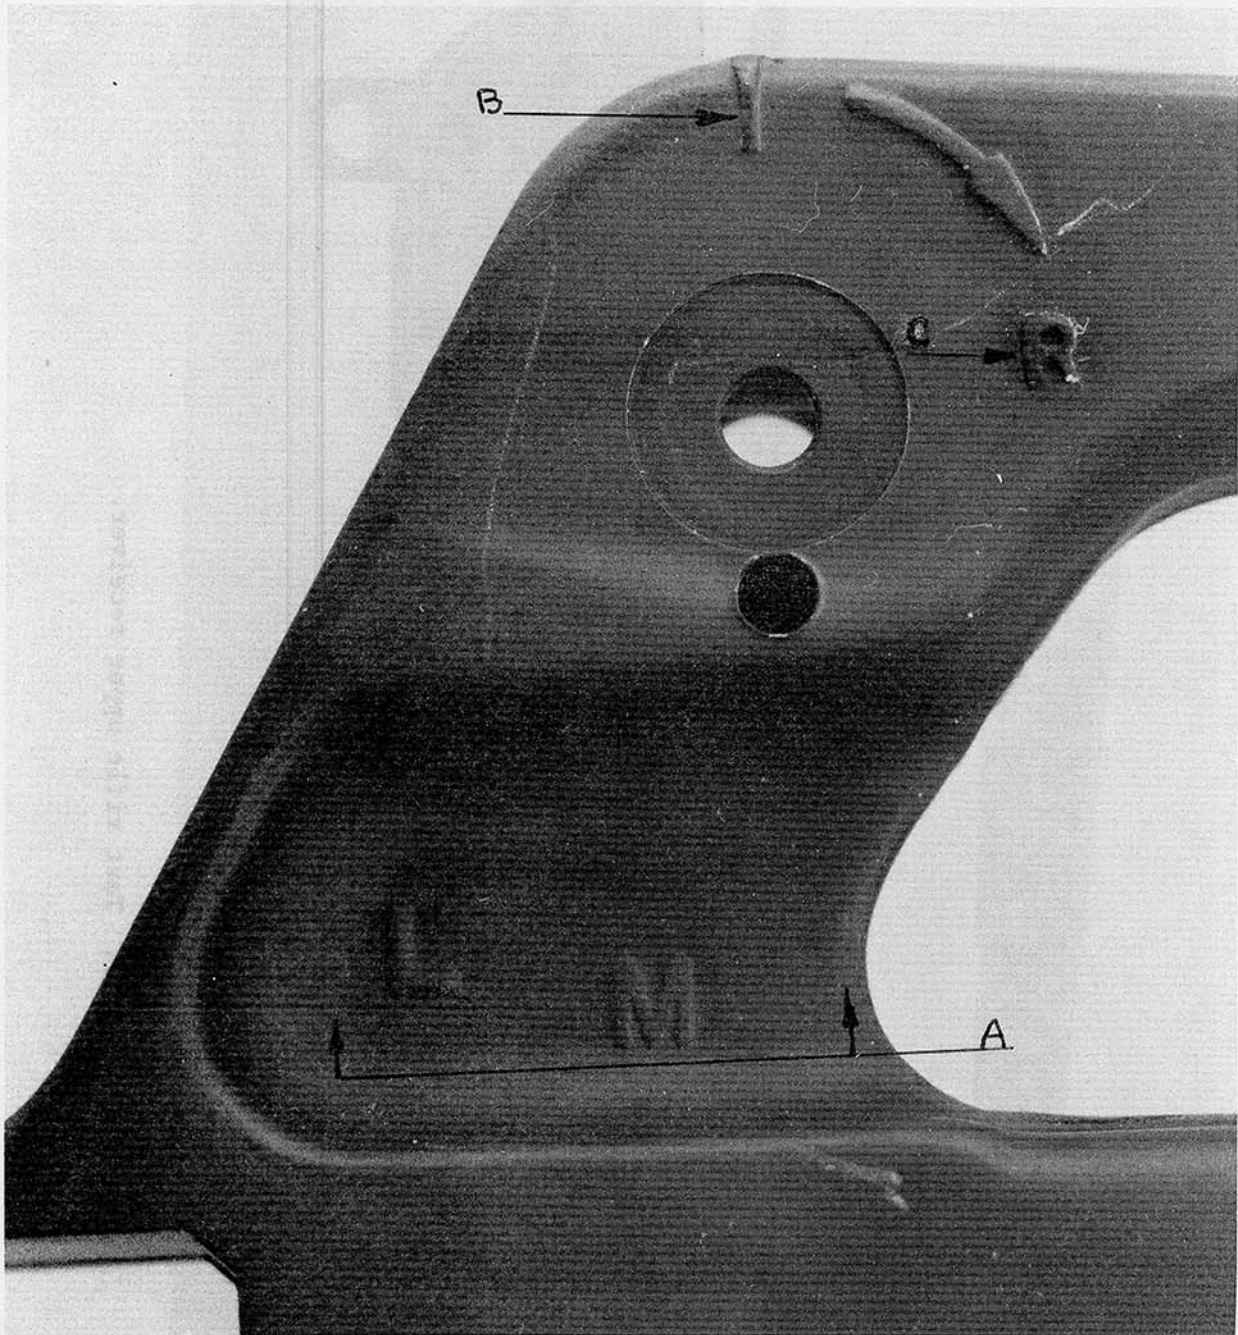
Upper receiver (US supply part - "LM" manufacturer mark).
